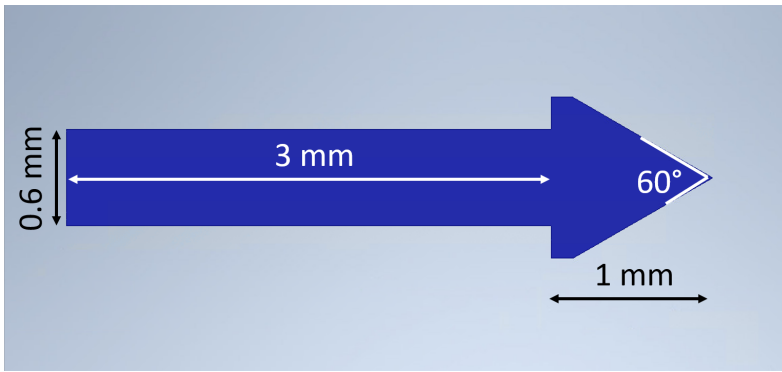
CAD drawing of the PEEK arrowhead valve with its dimension.
